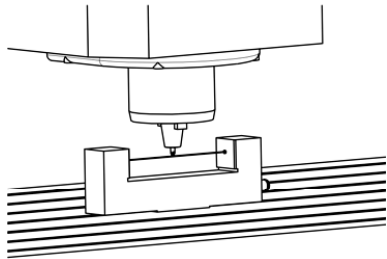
A conventional laser light barrier tool measurement system [18]. The light interruption is detected by a single opto-electronic receiver.
